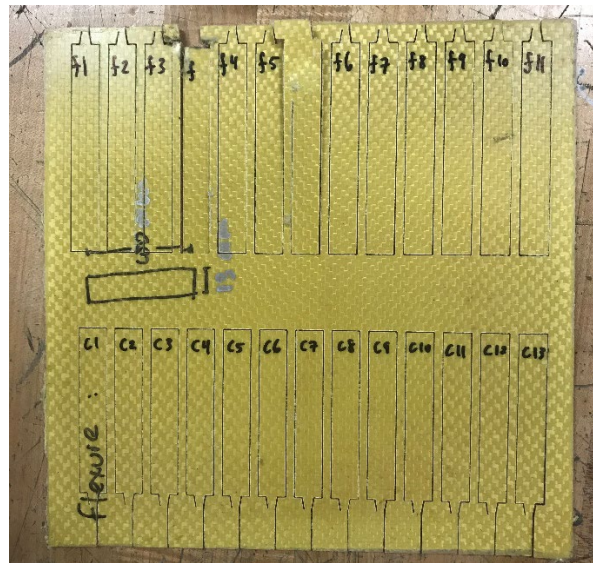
Flexure (top) and compression (bottom) samples after being cut by the waterjet with dimensions following ASTM D7264 and modified ASTM D695 respectively
